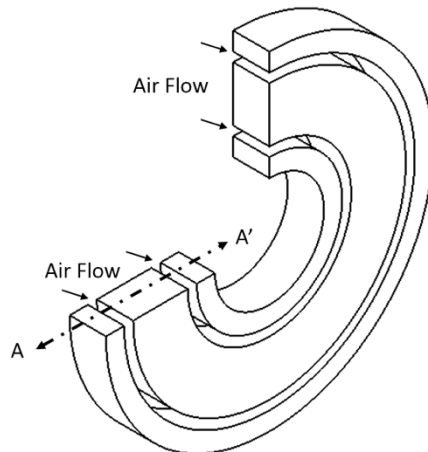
Geometry of Thrust Flat Air Bearing with Double Grooves
